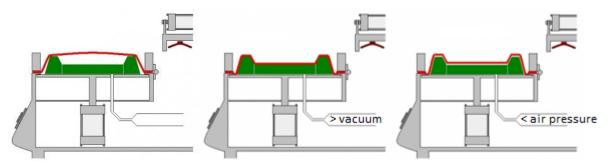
The mould will be pressed in the sheet, Figure 33b: The sheet will be vacuumed on the mould & Figure 33c: The shape will be released by blowing air (Agulon Kunststoffen, n.d.)
